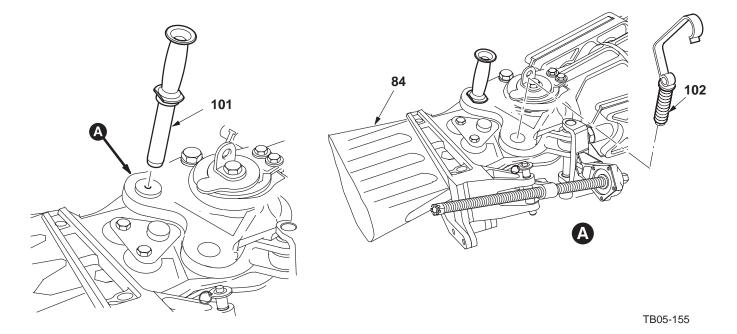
Aircraft Blade Pin from R/H AFT Blade Leading Edge
